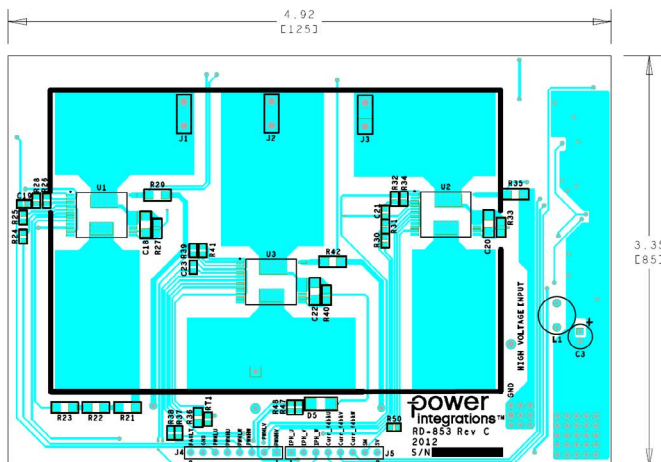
Triangular PCB Configuration Layout (125 mm x 85 mm).
